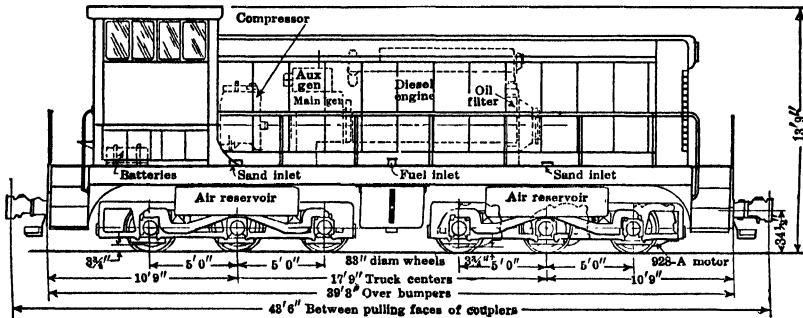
Six-hundred-hp, 75-ton, industrial switcher. (Courtesy of H. K. Porter Co., Inc.)
